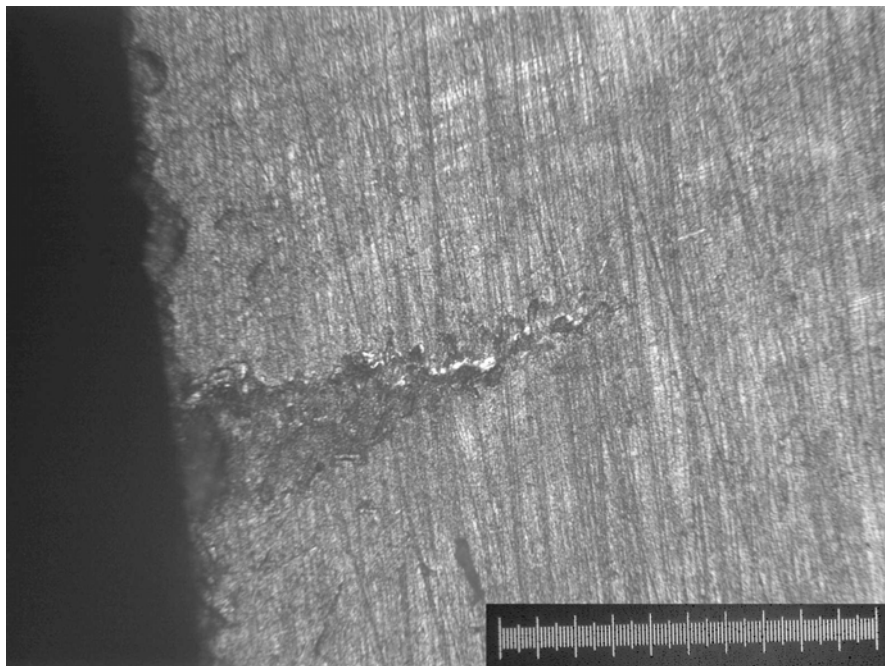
Microstructure of advanced machined process specimen#6 showing the defects caused by milling process at magnification 100x at location #4 on the surface
